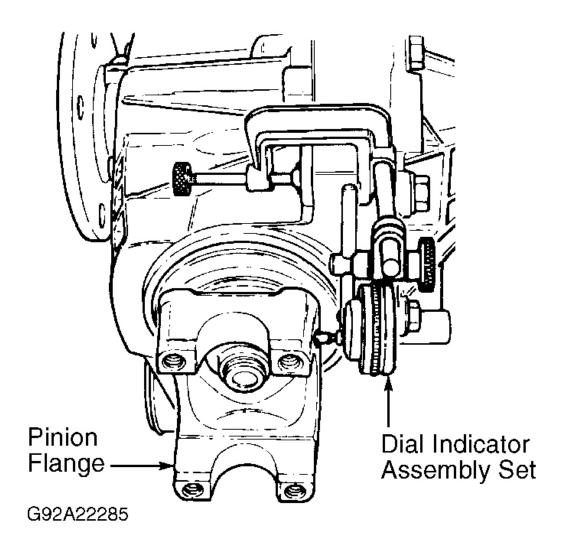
Measuring Backlash At Pinion Flange Courtesy of GENERAL MOTORS CORP.
